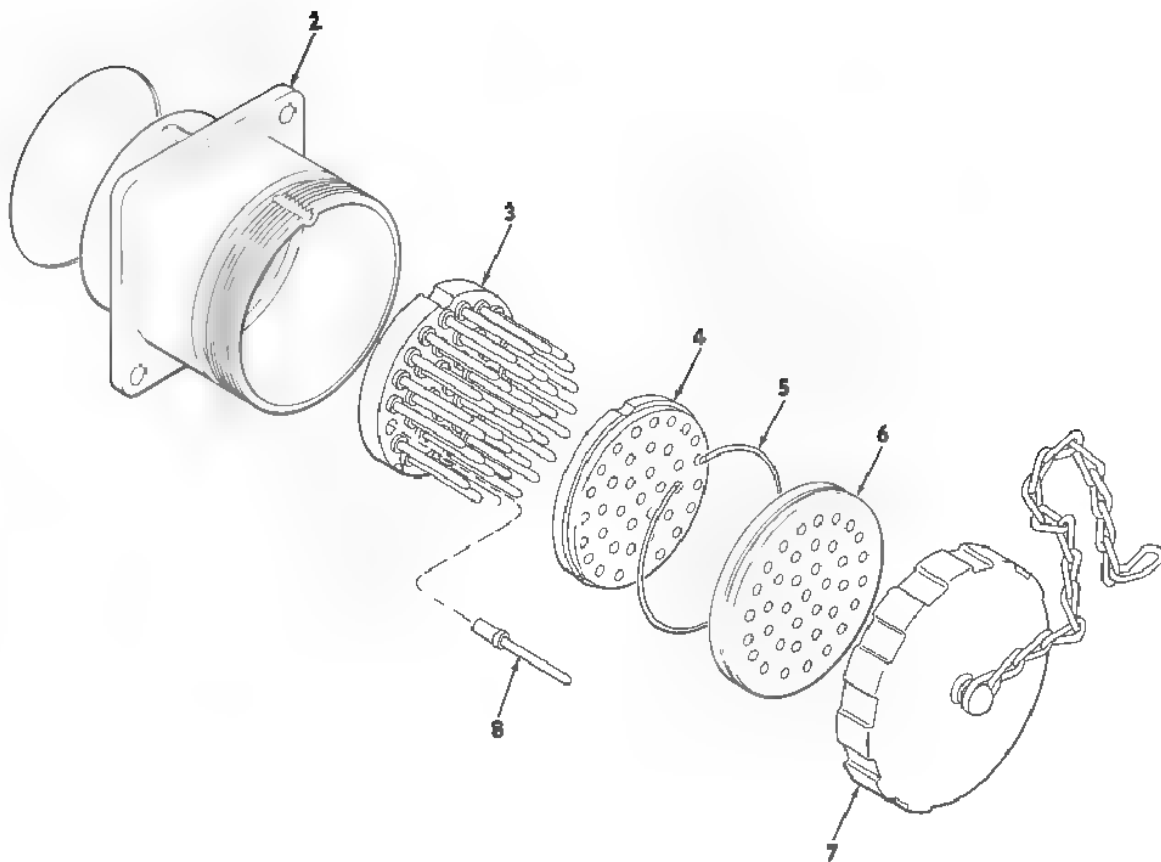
CONNECTOR, RECEPTACLE, ELECTRICAL /7632065/-EXPLODED VIEW
